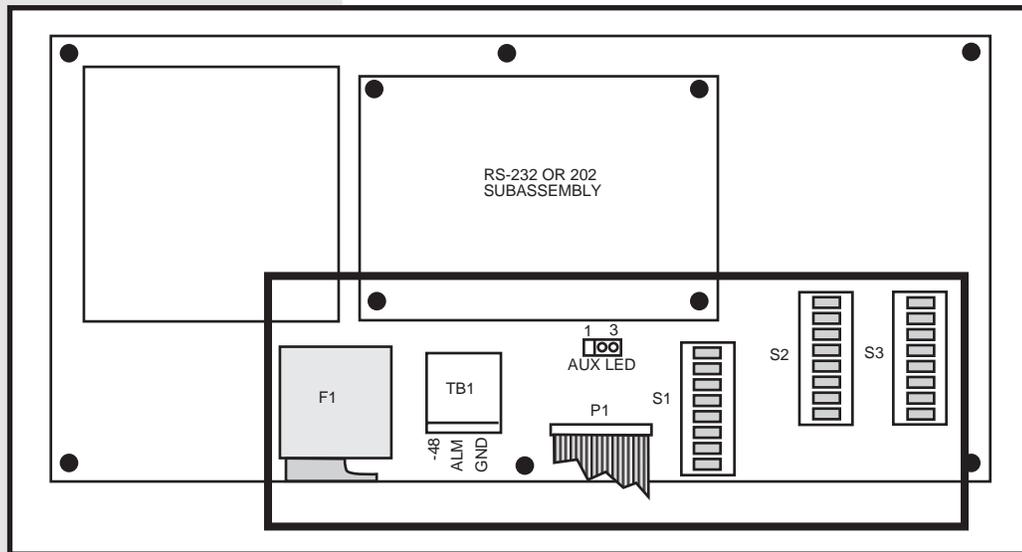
POWER SUPPLY BOARD COMPONENT LOCATION
